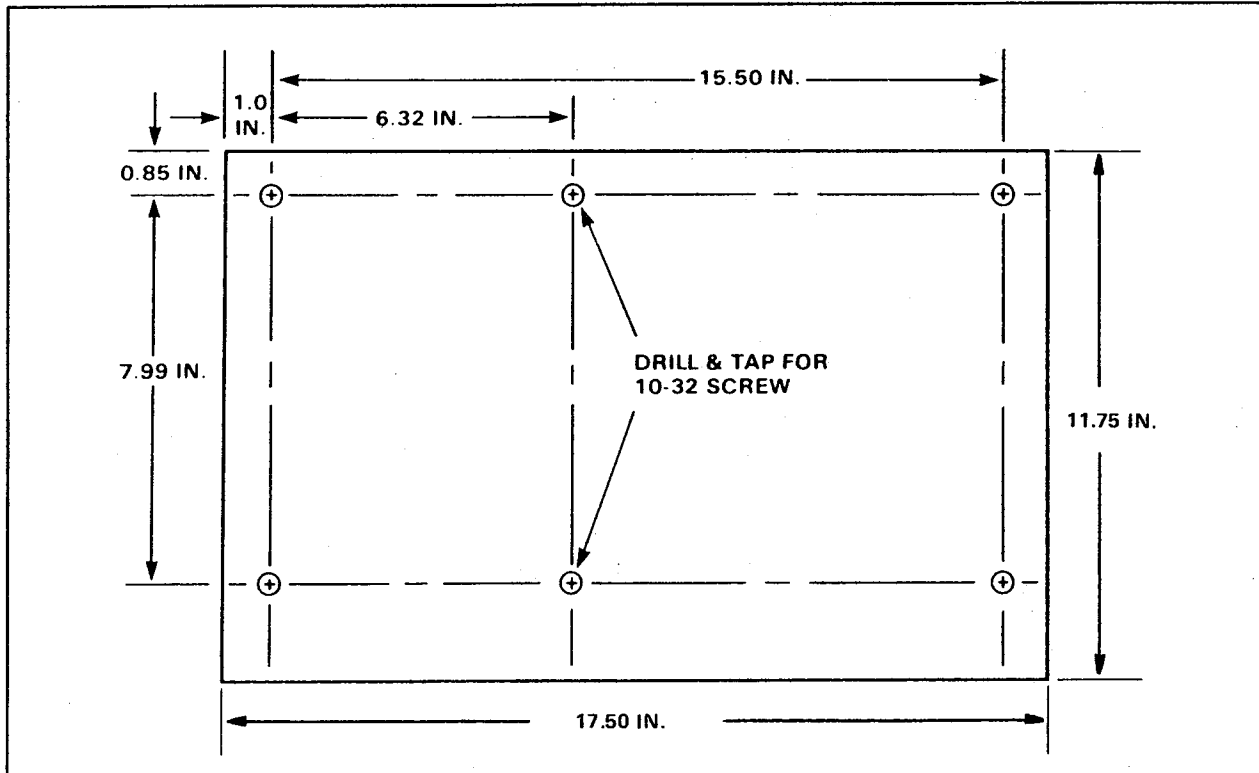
Layout Dimensions for 8-Module Rack (NLR-1008) or 9-Module Expansion Rack (NLRE-1009/1011/1011B)
